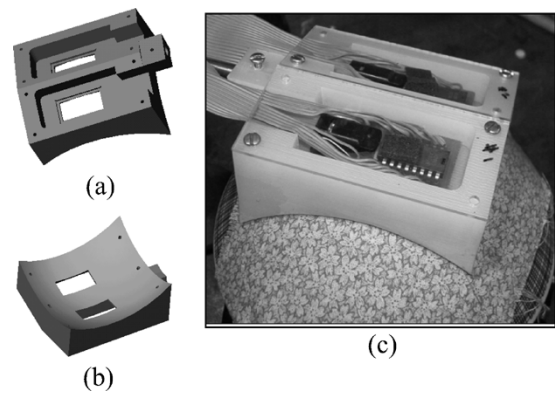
CAD model and prototype mechanical holder. (a) Top. (b) Bottom. (c) Experimental prototype.
